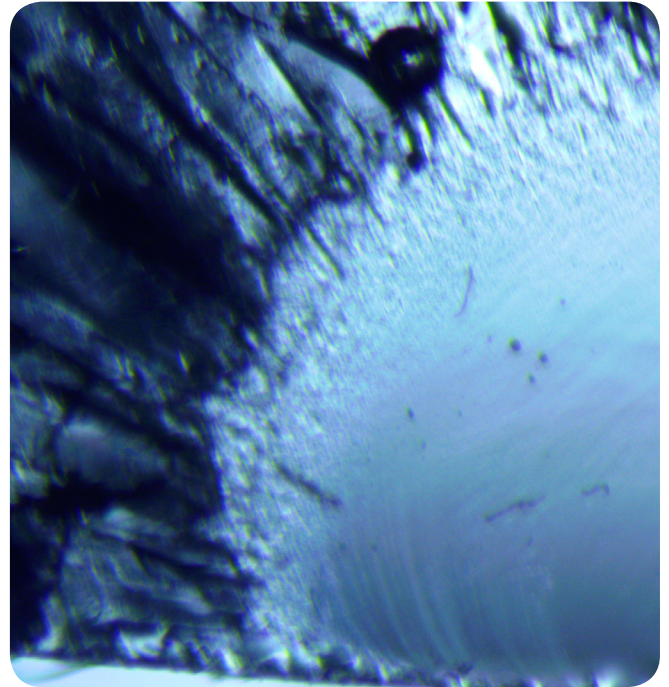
Specimen 3 microscopic picture of fracture surface
